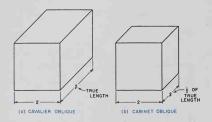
Cavalier oblique and cabinet oblique drawings.
